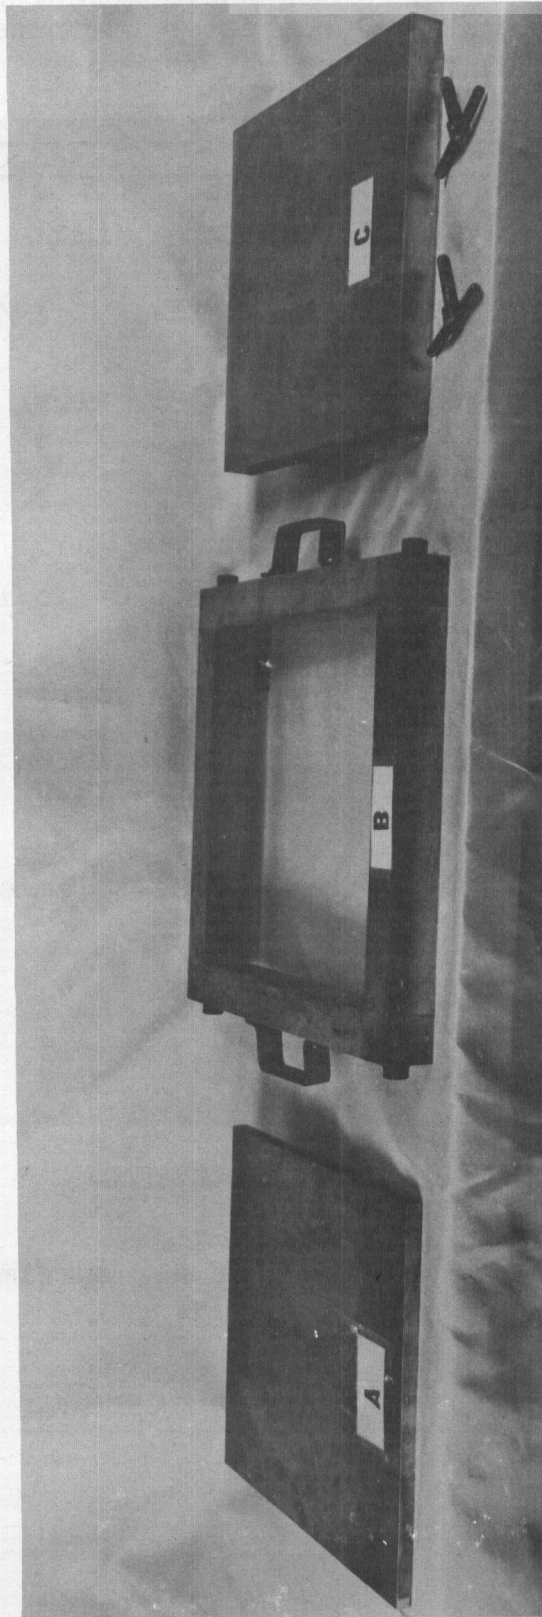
LAMINATING MOLD, DISASSEMBLED
